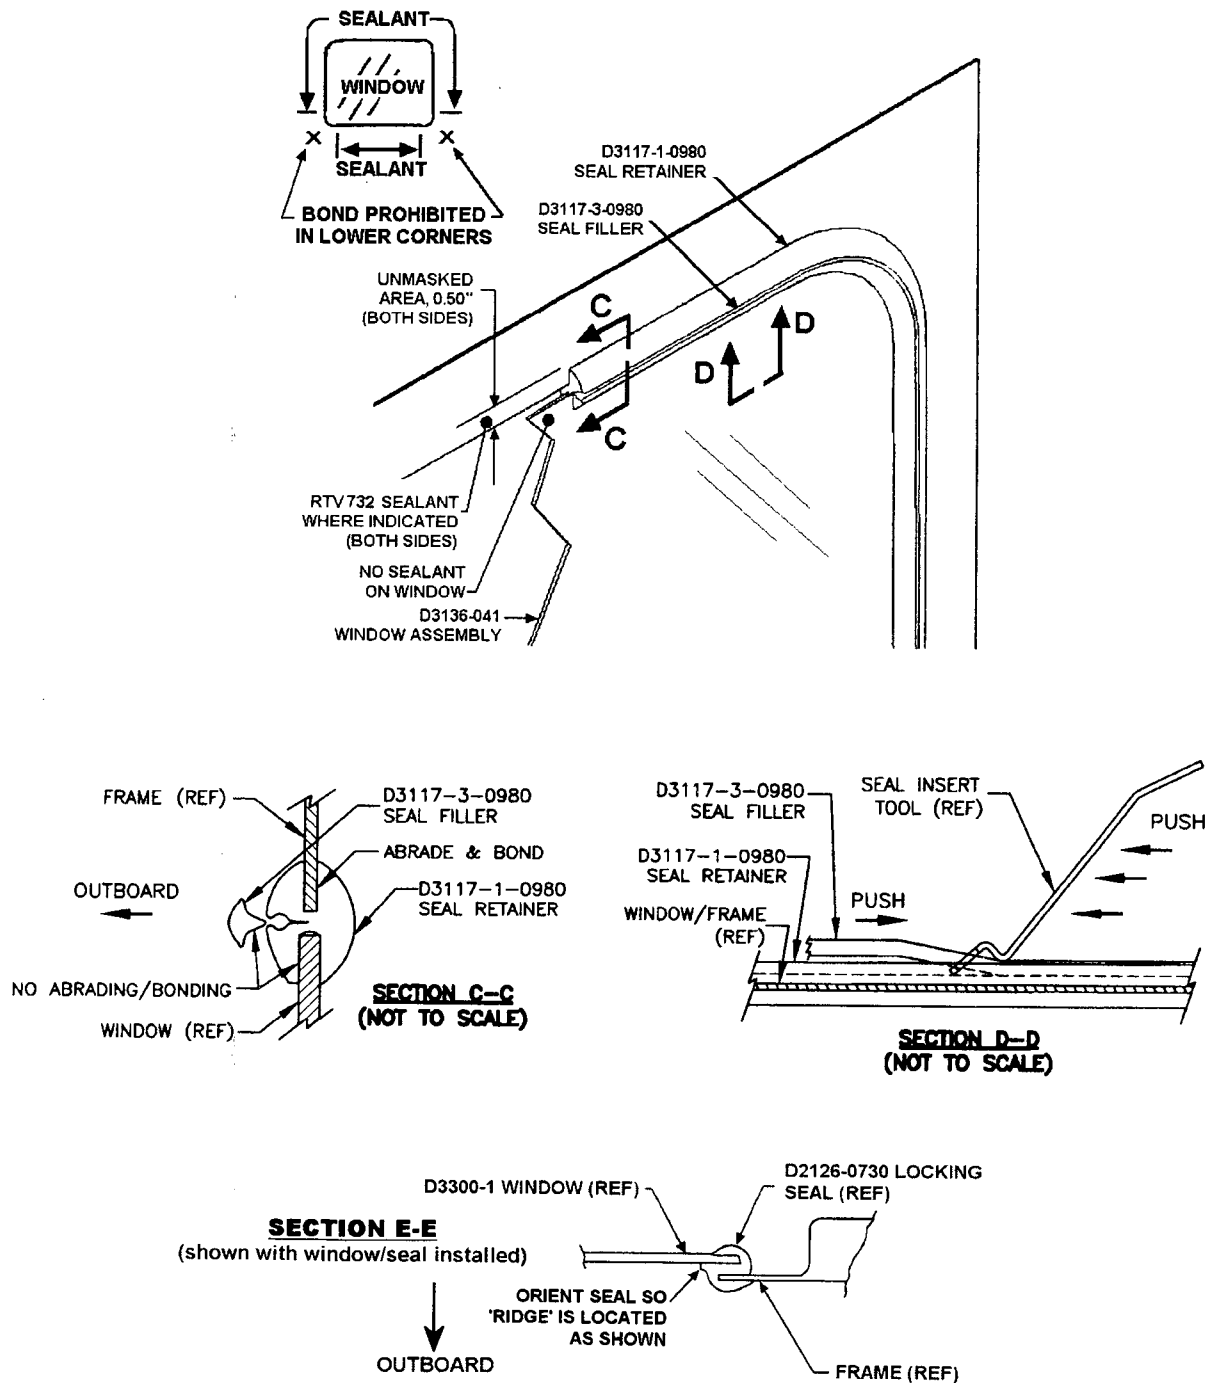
window/Seal Installation, (D412-694-01/-02 Door Assembly)
